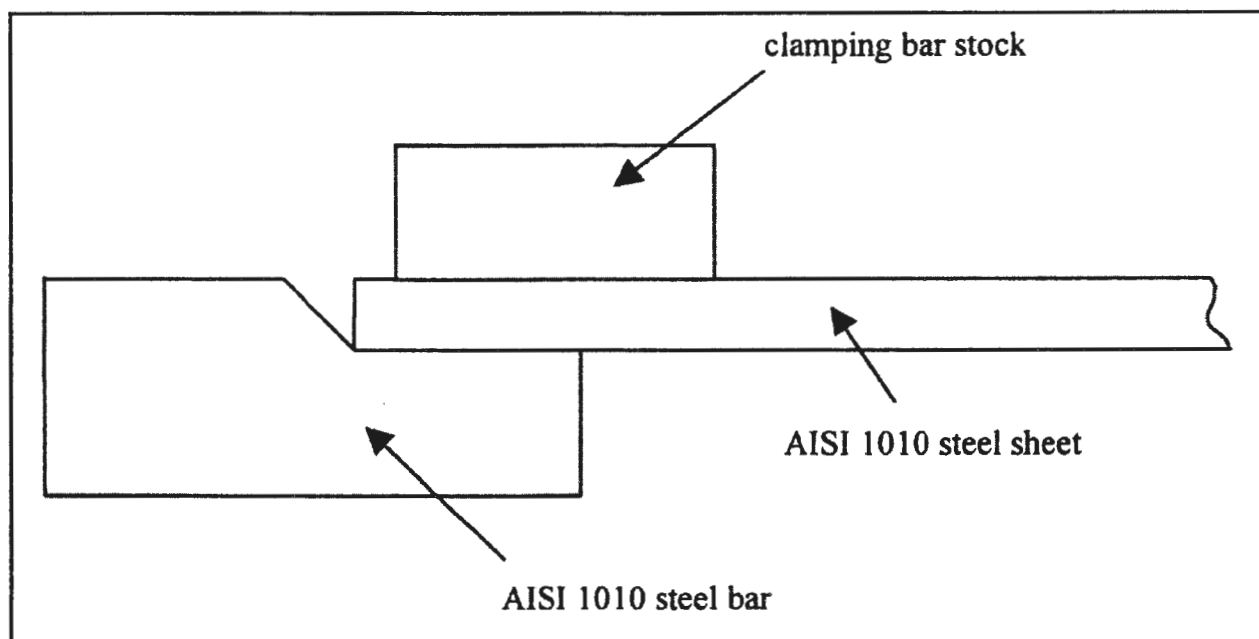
Method utilized by Aerotek to perform fillet weld.
